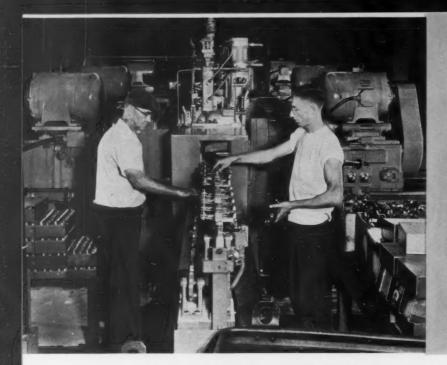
Bolt holes and oilholes in both the connecting-rods and caps are completed on this multiplestation transfer machine. The holes are automatically checked at fourth station.
